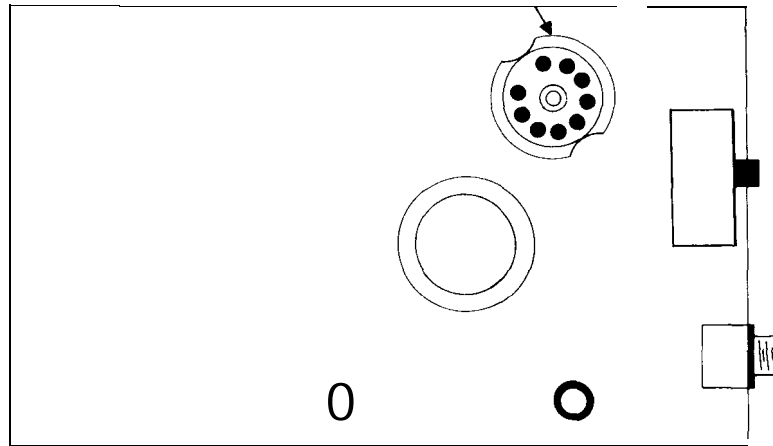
BPA-60/BPA-125 Printed Circuit Board
